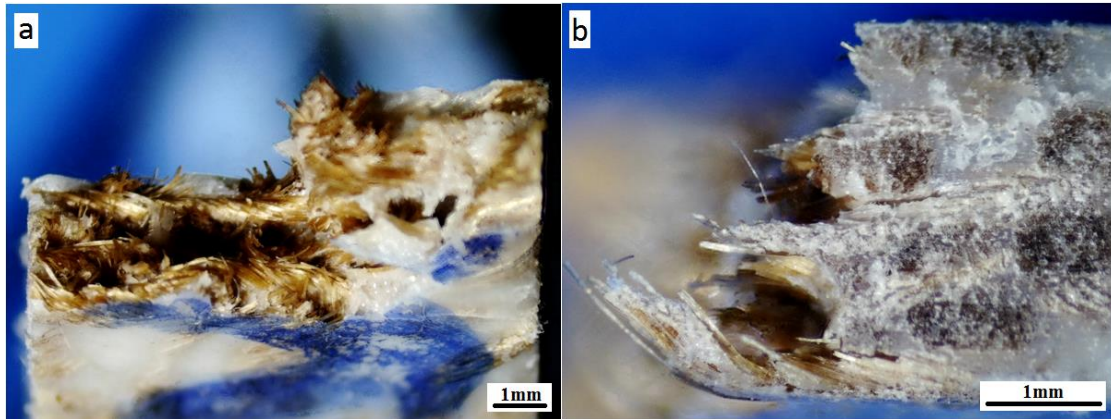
Microscopic image of Charpy impact tested samples of 3D orthogonal commingled specimens, (a) fracture face (b) side view
